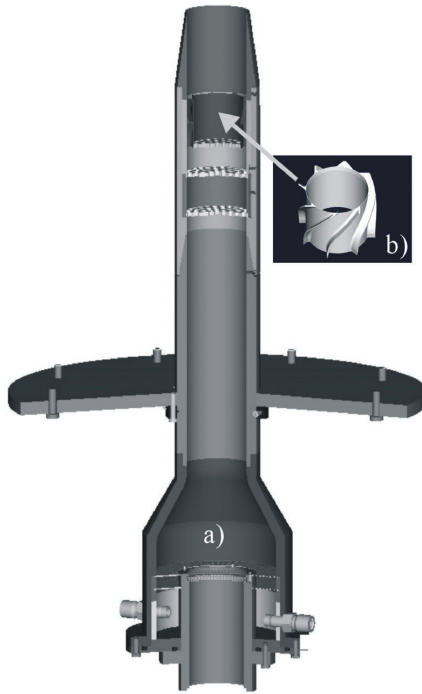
a) Cross-section of burner without swirl assembly. Premixed air and fuel enters via four nozzles (two visible) and passes several perforated plates before reaching the swirler. b) swirl assembly; arrow marks the location where the assembly is installed.
